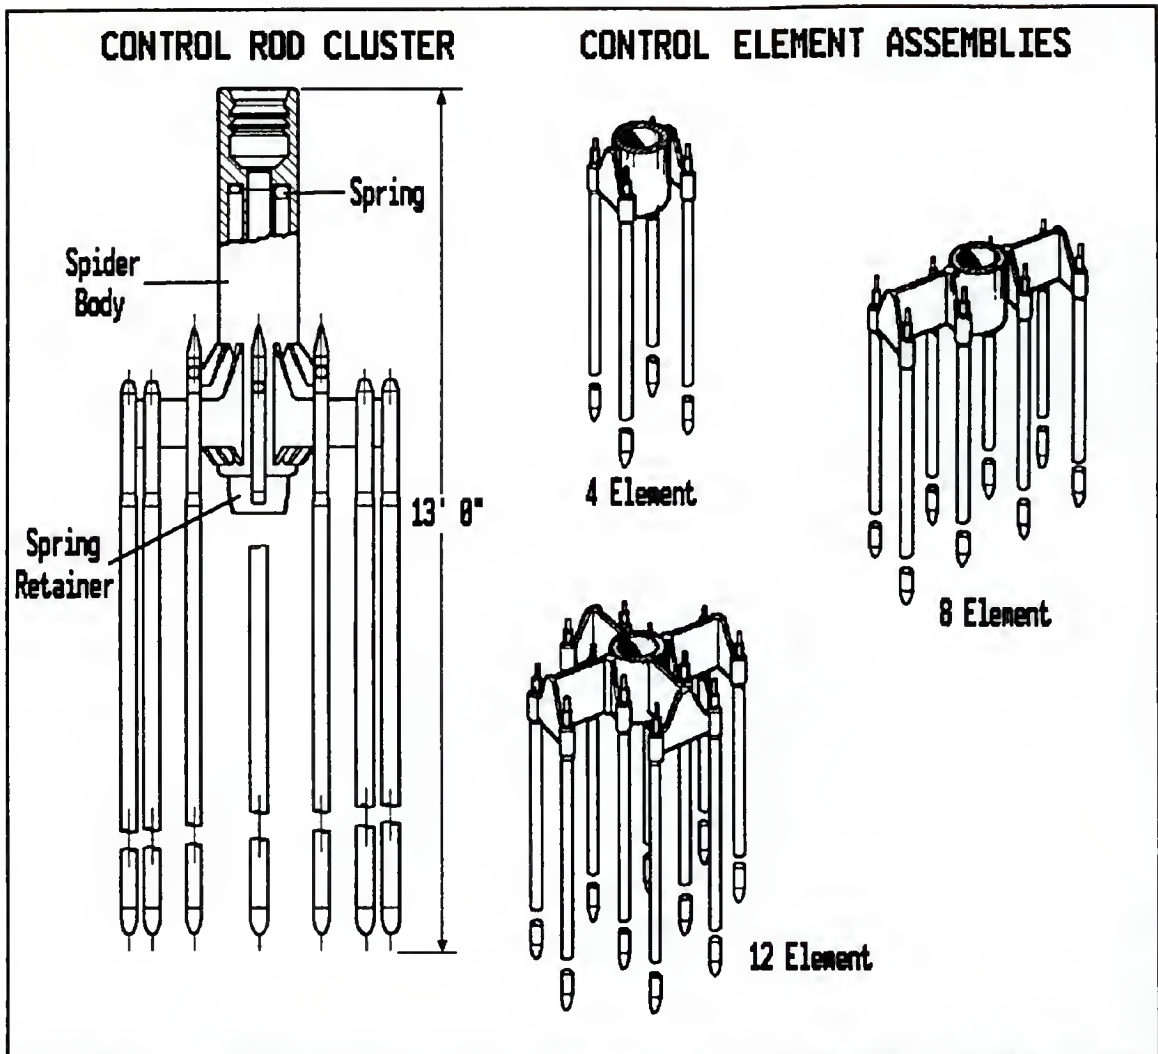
PWR Control Rod Assemblies. The left diagram illustrates a Westinghouse Control Rod Assembly while the right diagram shows three different configurations used for Combustion Engineering Control Element Assemblies.
